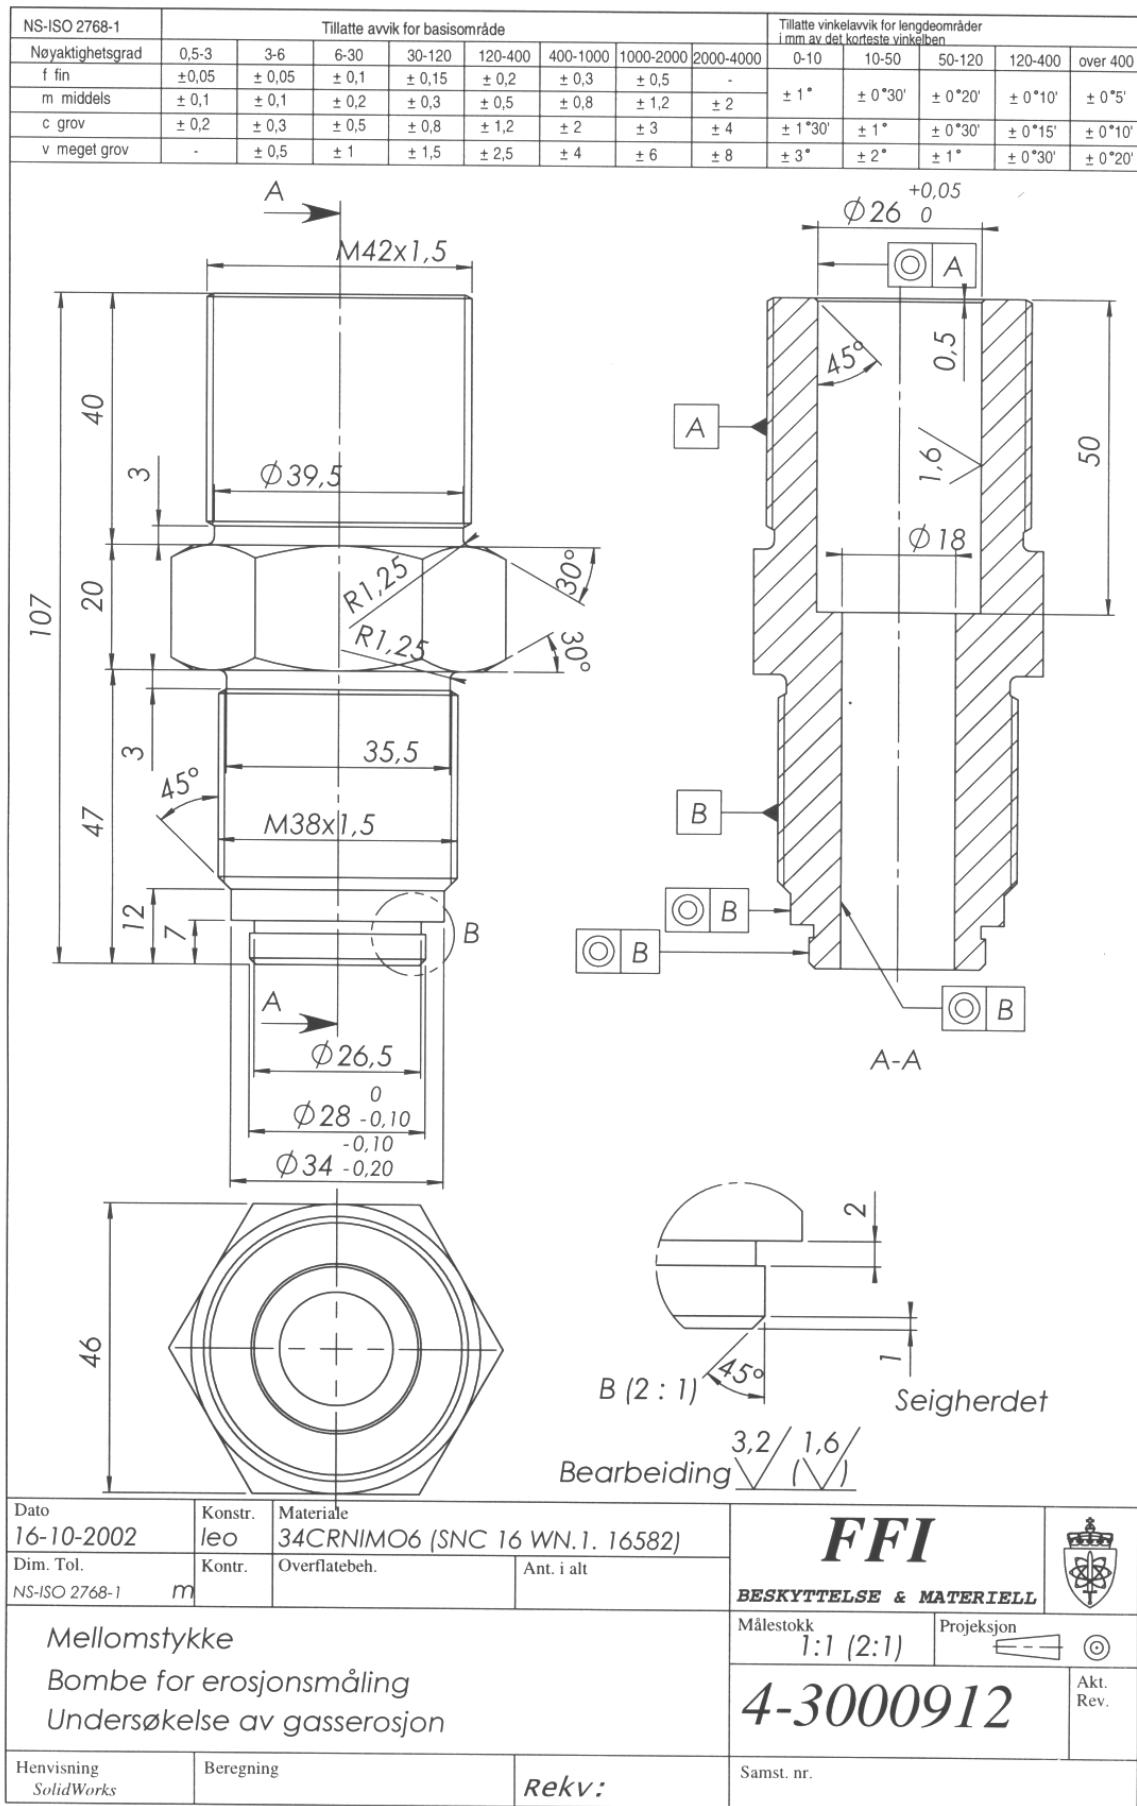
Nozzle holder for the outlet of gas in the erosion bomb.
